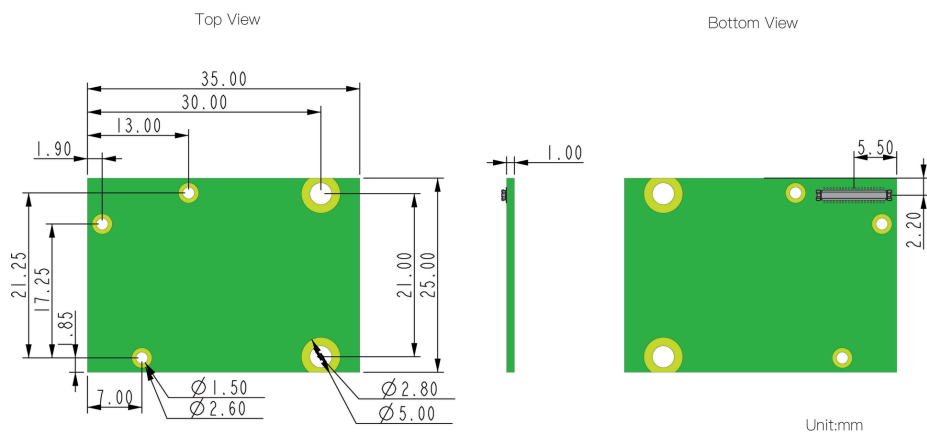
RAK13300 WisBlock LPWAN Dimensions
